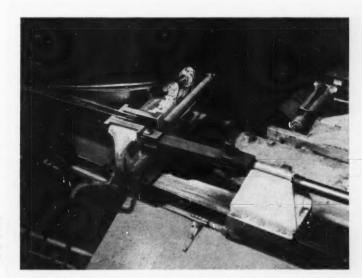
Removing the supporting strips from the inside of a completed bend. Steel blocks welded to the ends of two inner groups of supporting strips are gripped in a vise and the strips are withdrawn by means of a draw-bar on the bending machine.
